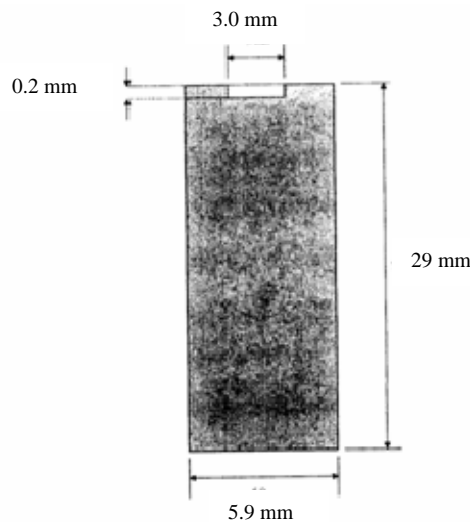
Cylindrical Recessed Cup Type Cu Rod, after reference [20].
